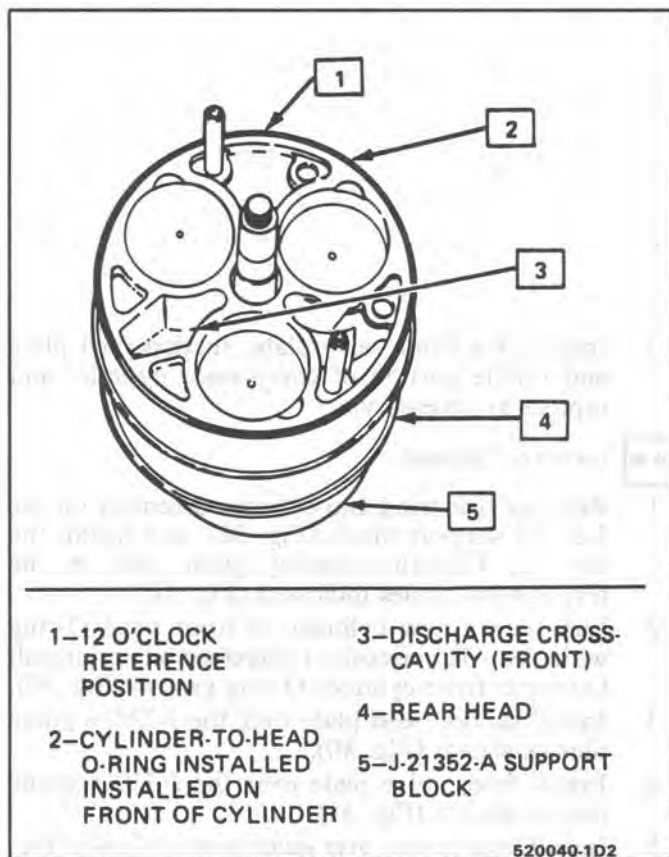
Cylinder and Shaft Assembly Installed Over Guide Pins Into Rear Head
